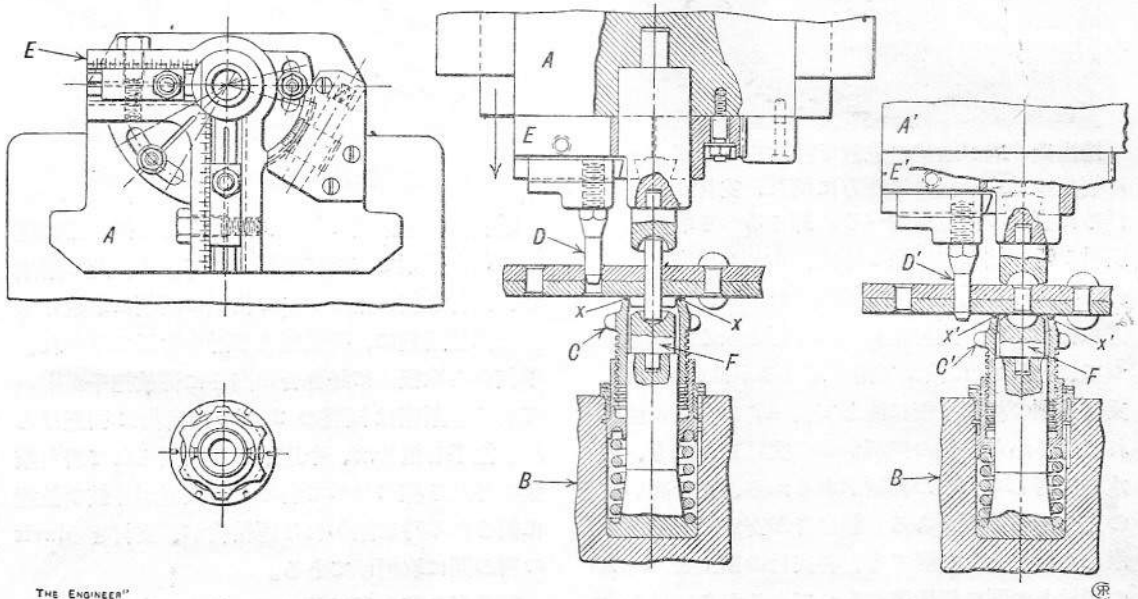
DETAILS OF PIN RIVETING MECHANISM
